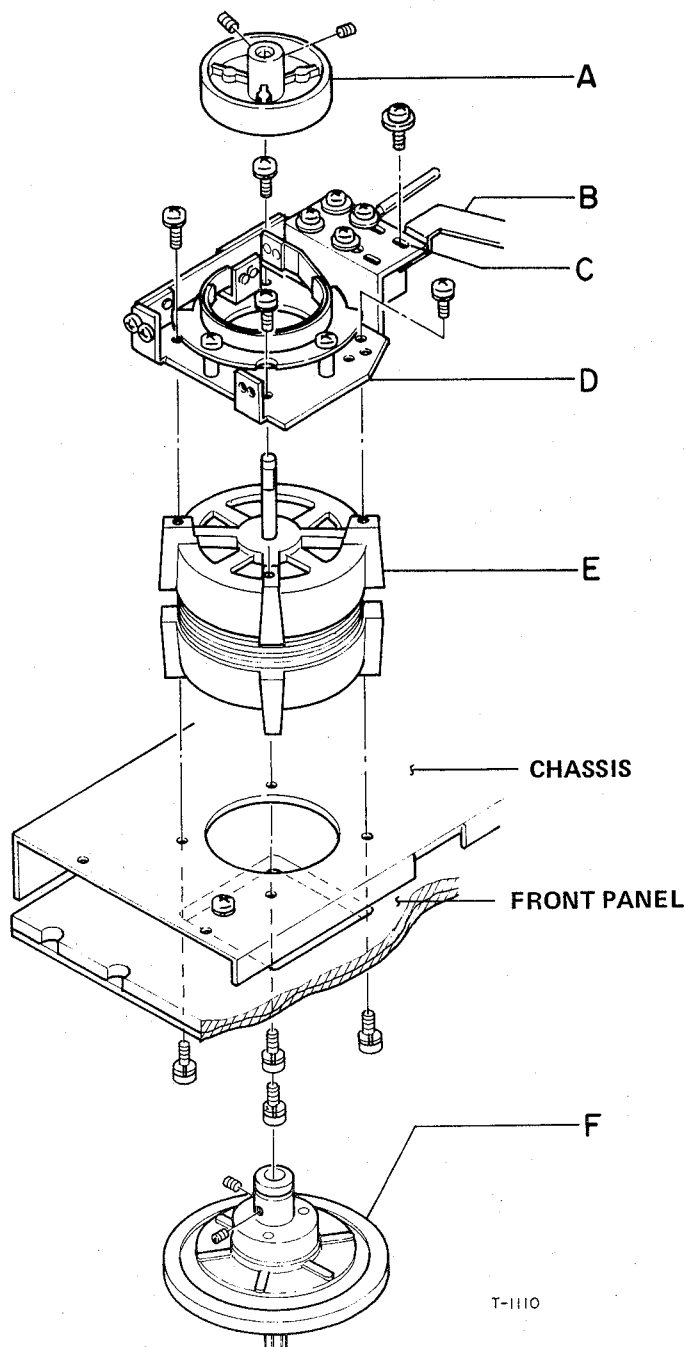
Capstan Motor, Flywheel and Capstan Ass'y Removal
